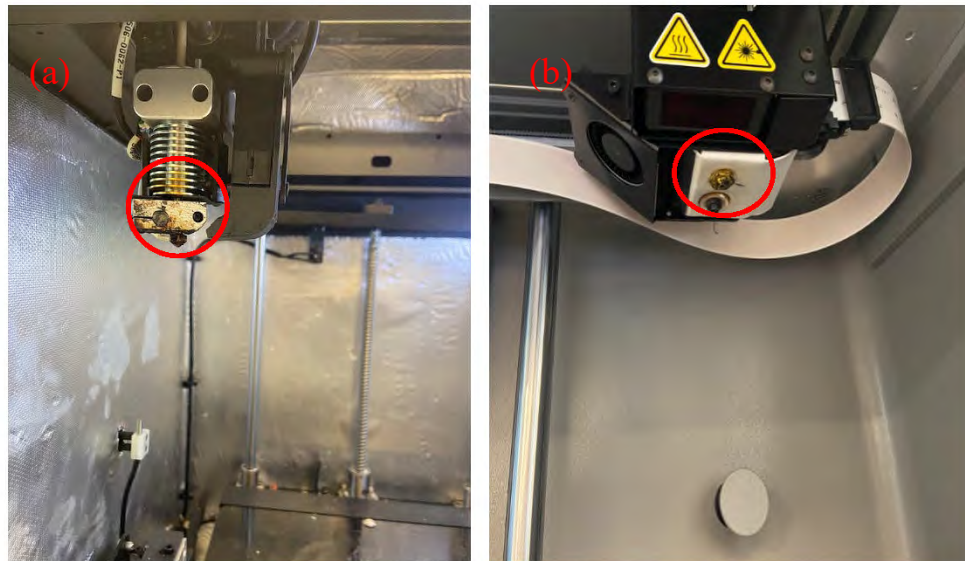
a) Intamsys funmat HT 3D Printer with 0.4 mm nozzle, and b) Markforge X7 3D printer with 0.4mm nozzle.
